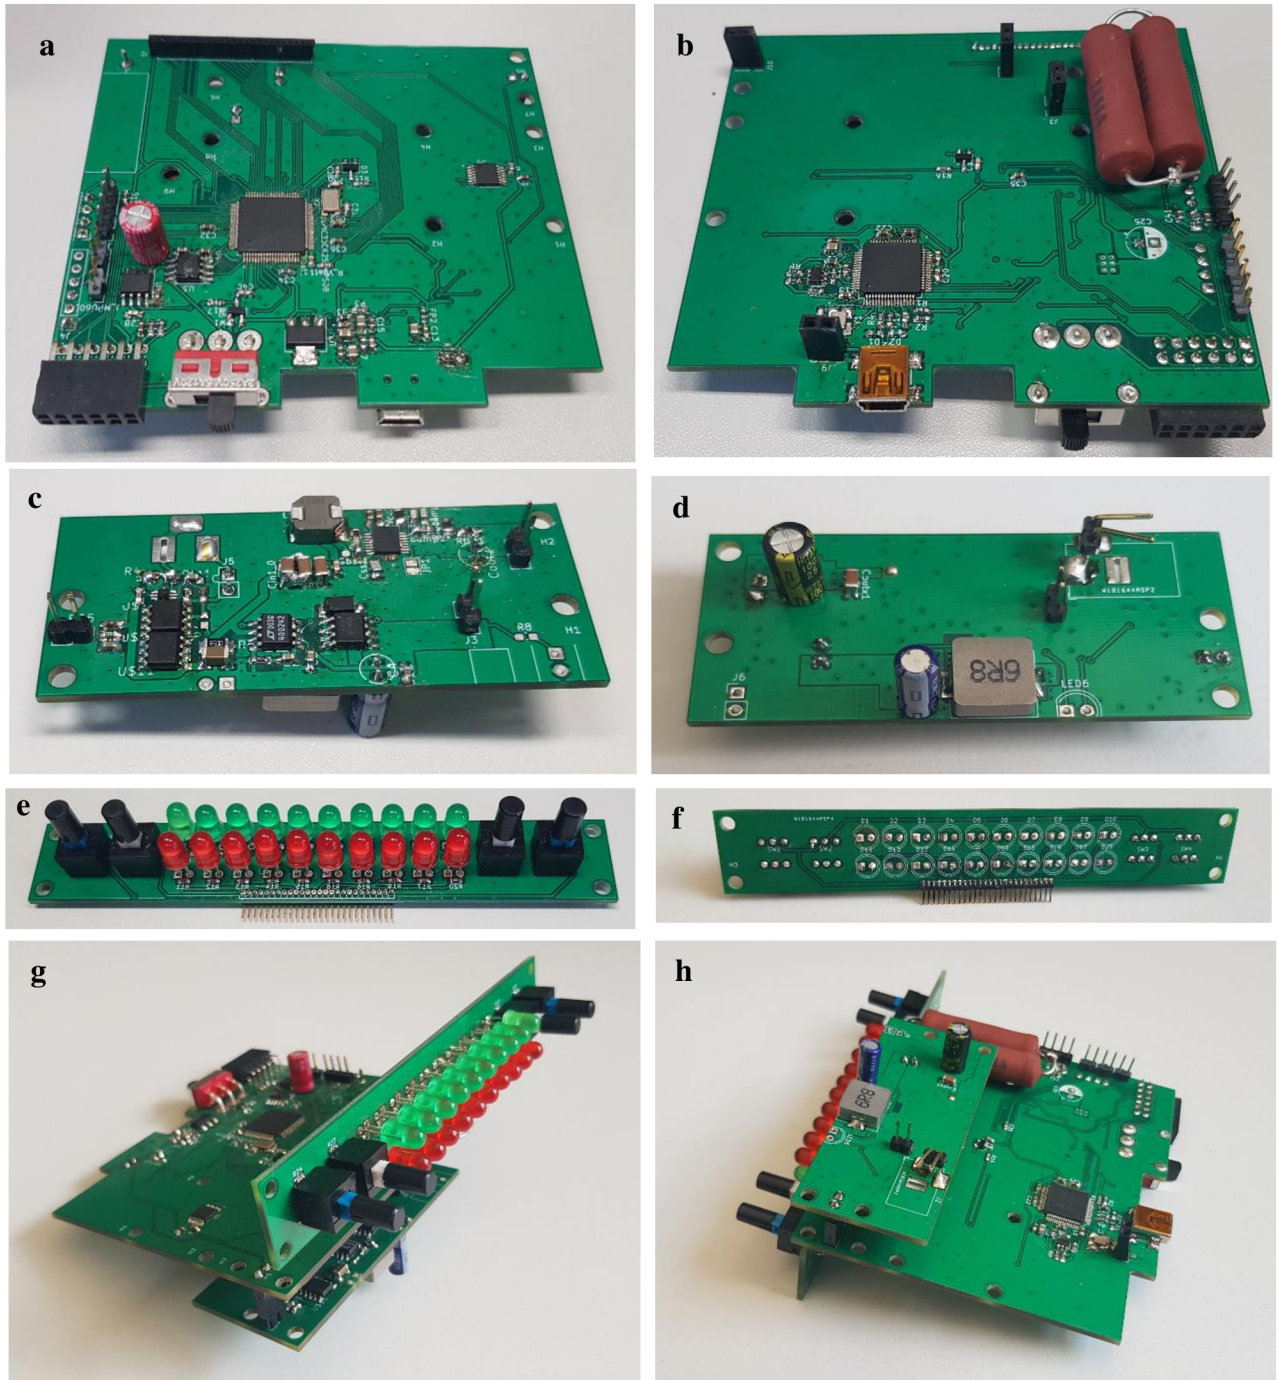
PCBs: a, Main board – top view, b, Main board – bottom view, c, Battery board – top view, d, Battery board – bottom view, e, Interface board – top view, f, Interface board – bottom view, g, Mounted PCBs – top view, h, Mounted PCBs – bottom view,
